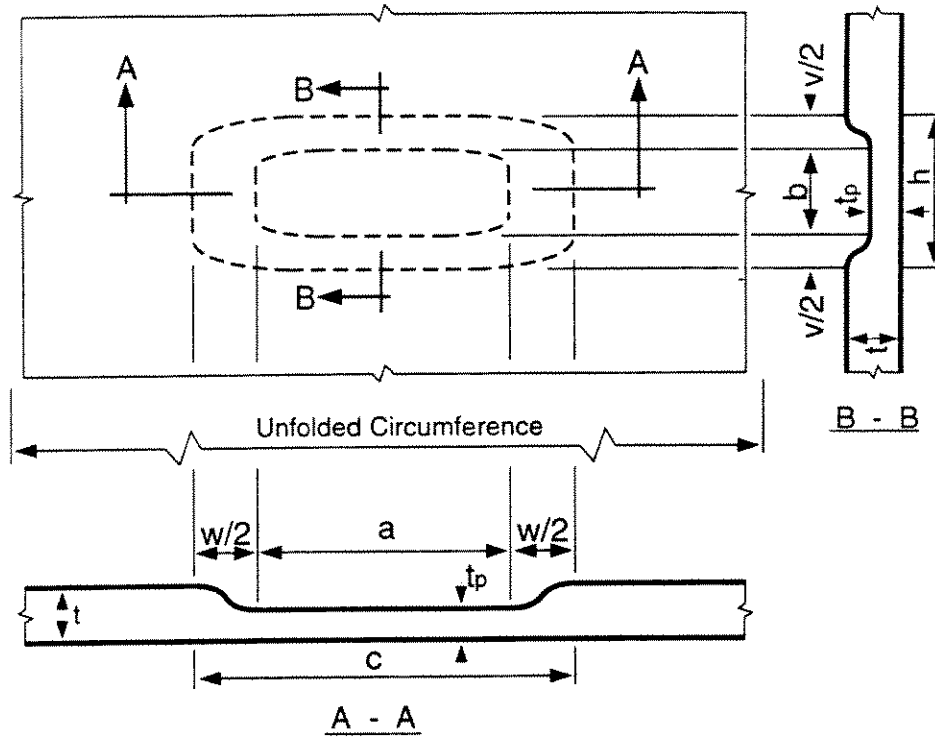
Layout of Corrosion Patch and Dimensional Parameters [10]
